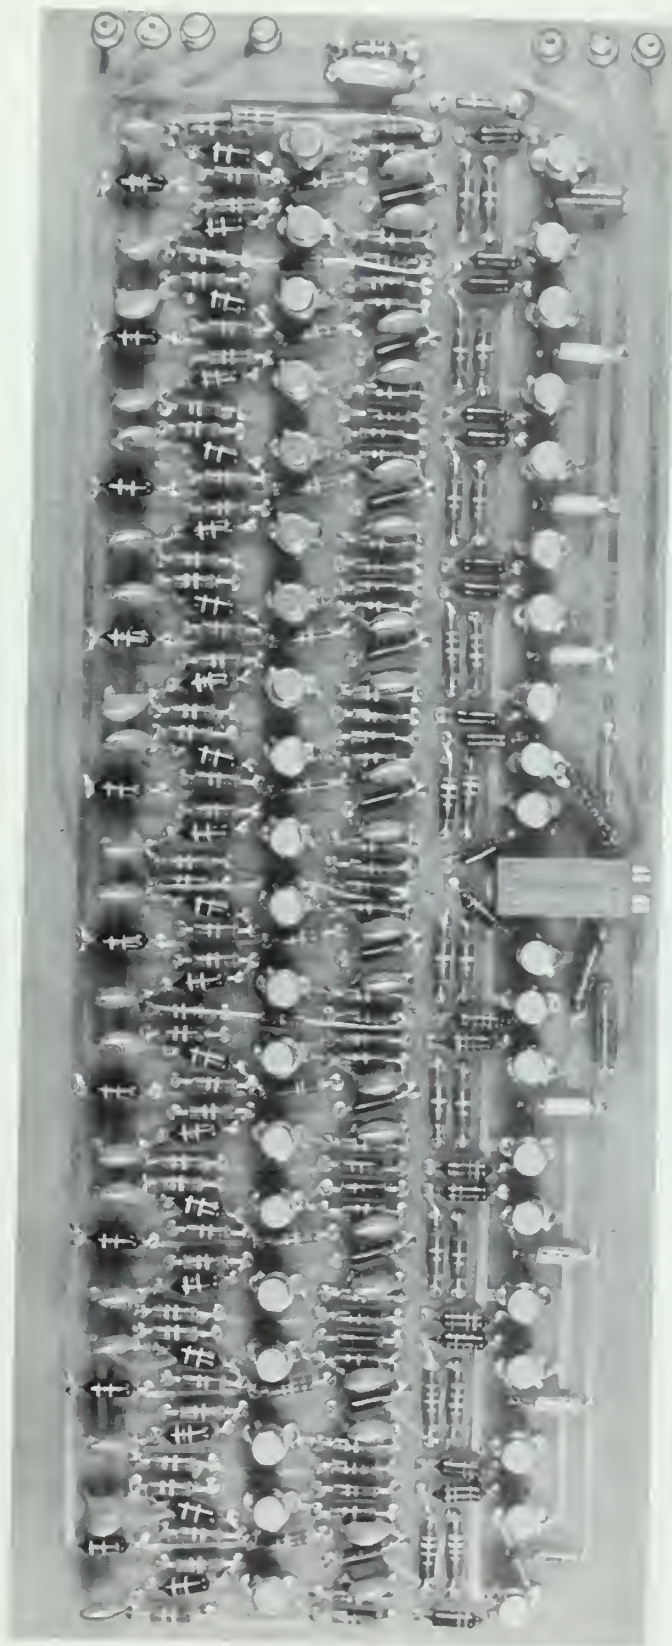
Typical Scaler PCB (PCB 2, 4, and 6)
